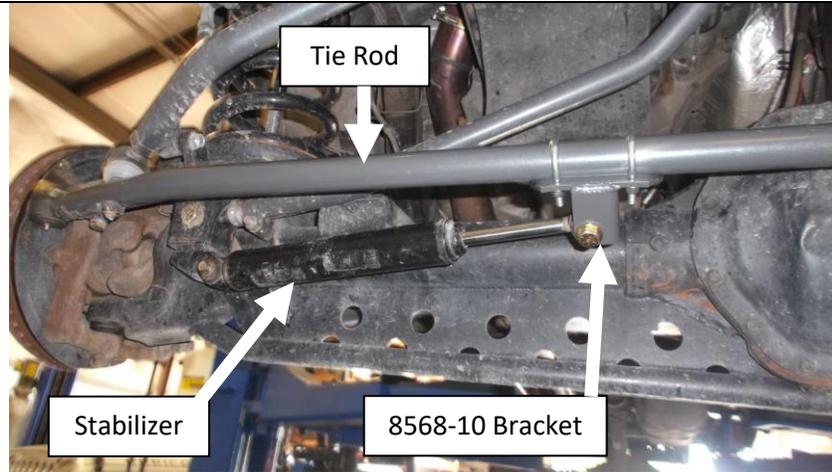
Steering Stabilizer Shown Mounted to 8568-10 Bracket
